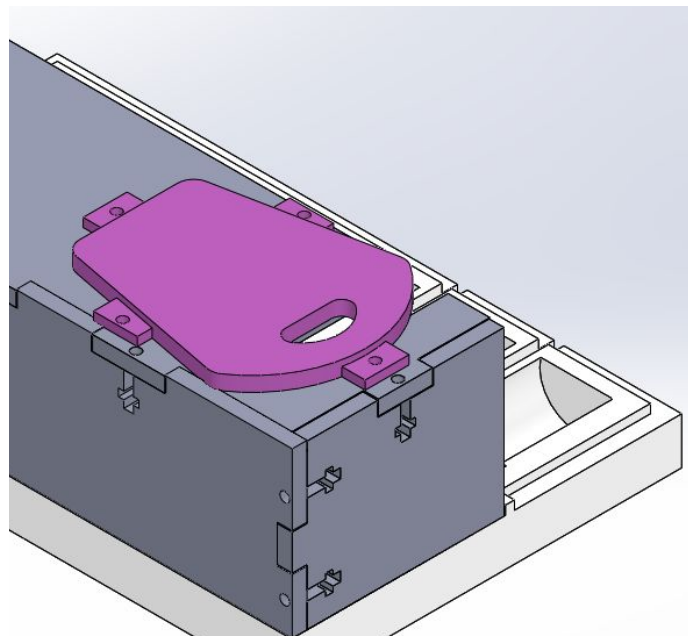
The final design for the oral cavity mount, created in Solidworks.
